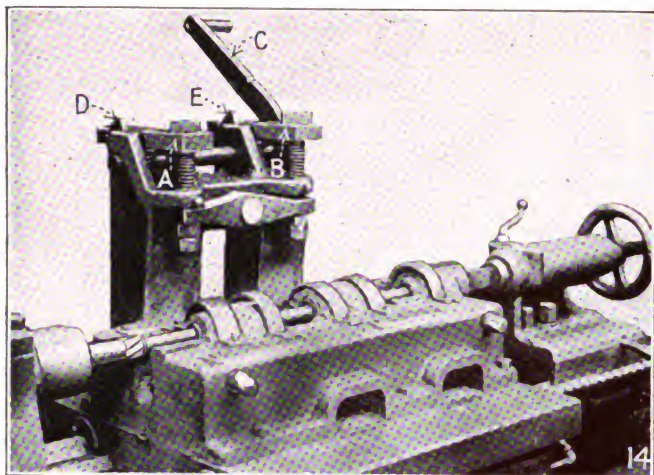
Fixture for boring main bearing, shown in lathe between centers.
